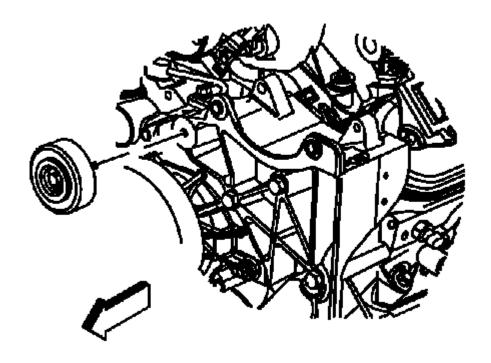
View Of Drive Belt Idler Pulley Courtesy of GENERAL MOTORS CORP.
